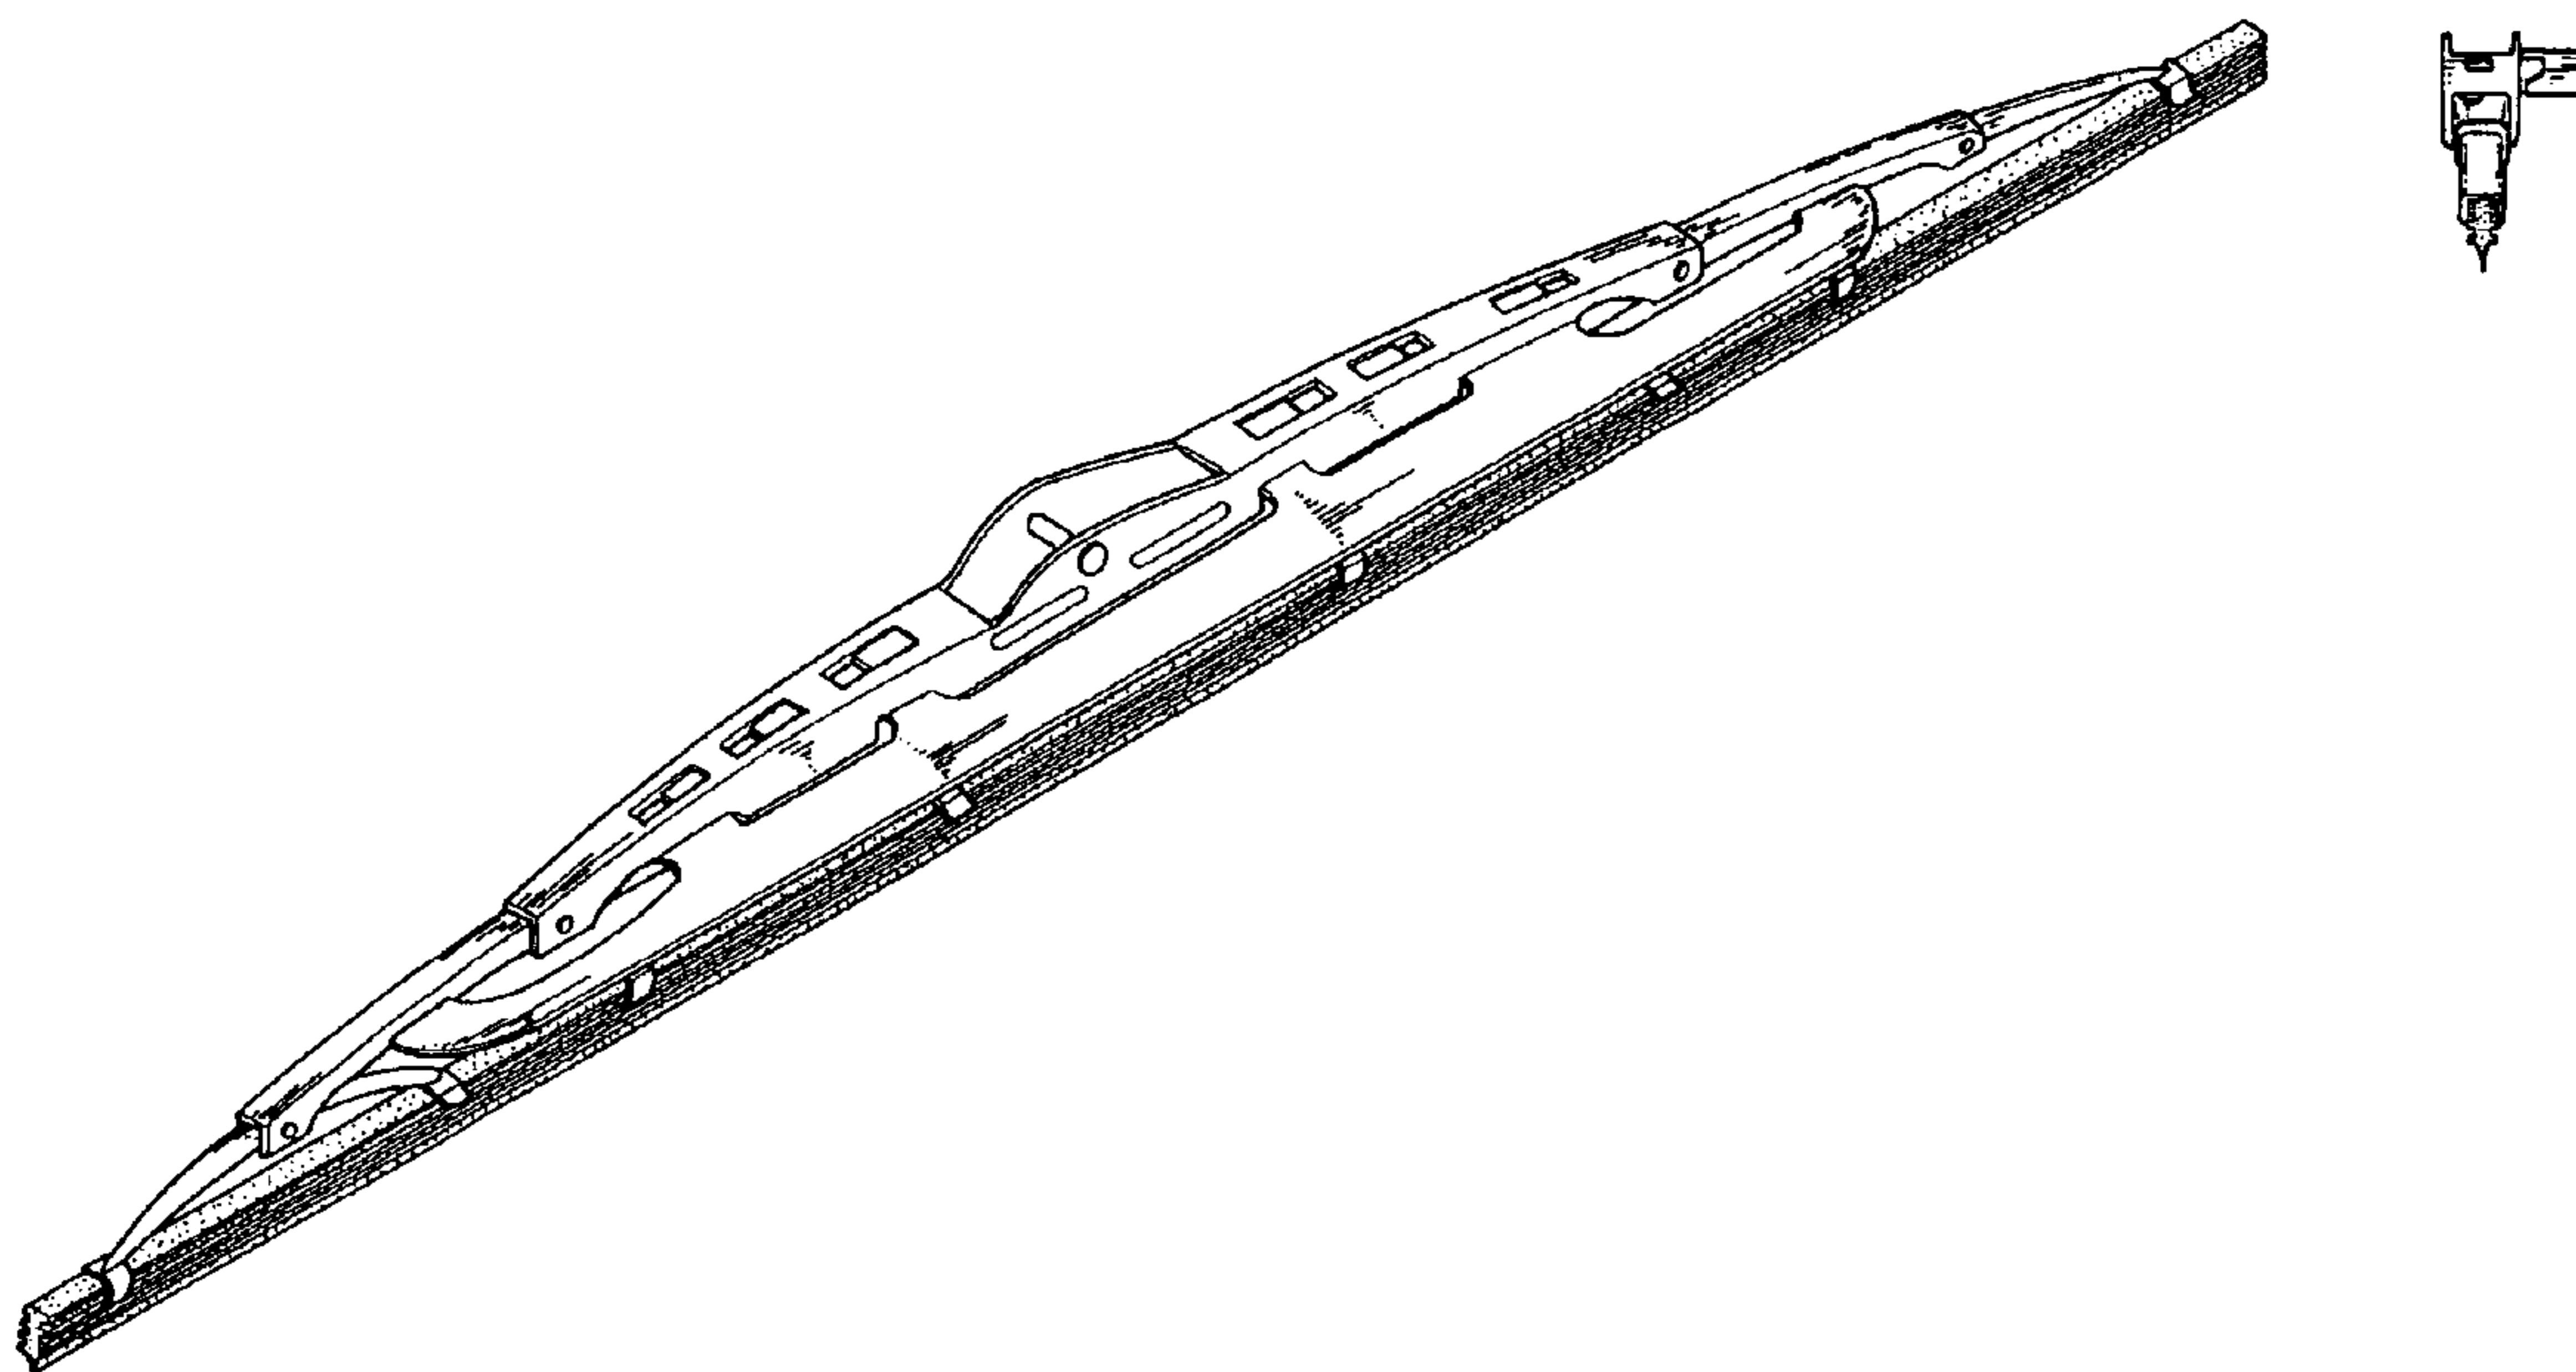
is perspective view of a windshield wiper showing my new design;
